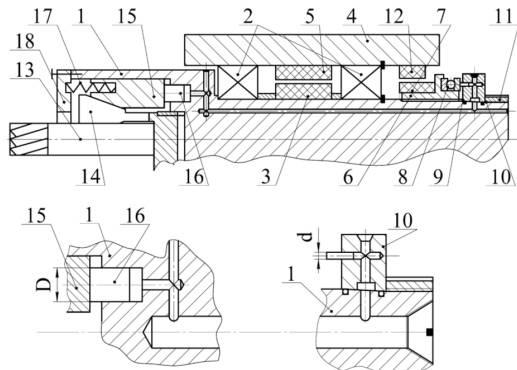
Automatic clamping mechanisms as part of the motor spindle of the machine according to the structure (1)
